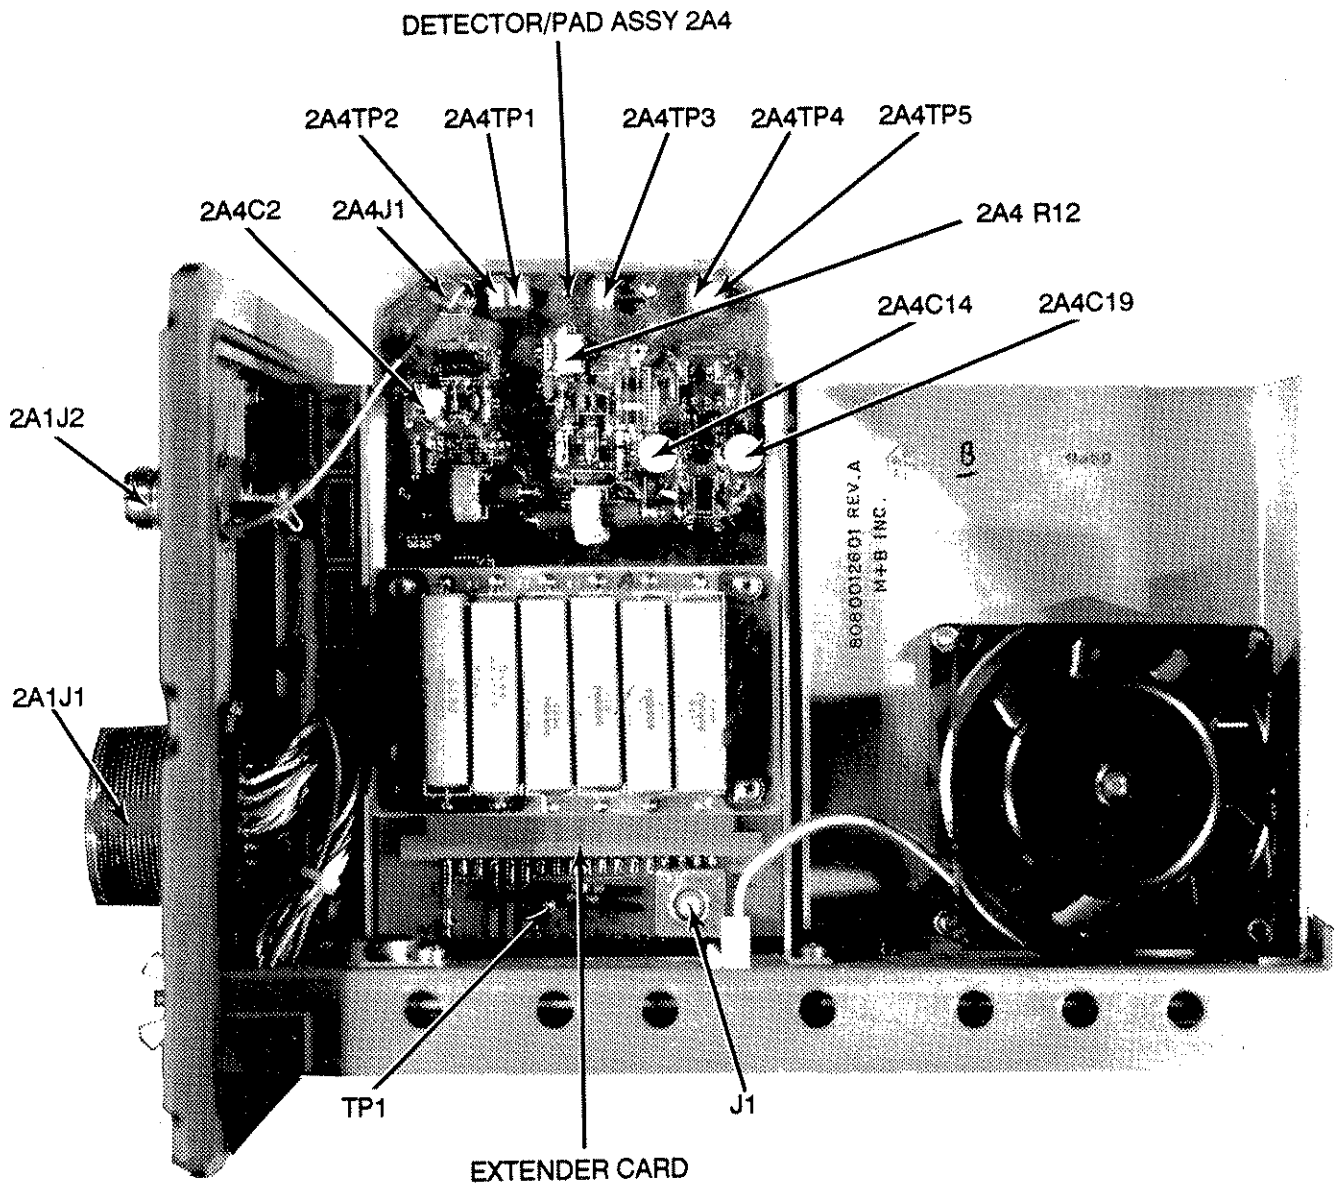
Major Assembly and Component Locations (Sheet 5 of 5)
